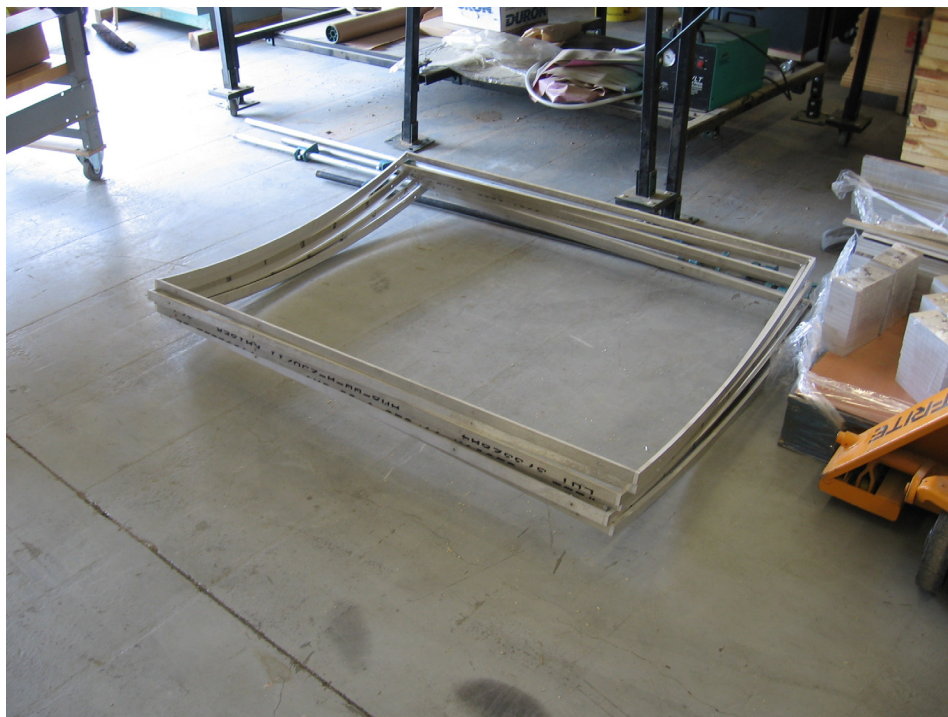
Final Parts – Welded Shade Frame (Fall, 2007)
